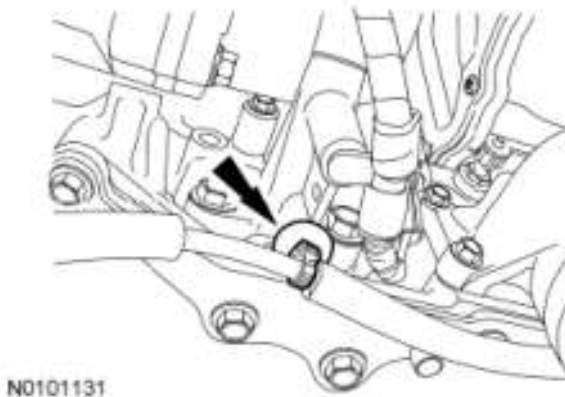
Locating Transaxle Selector Lever Cable Fastener
